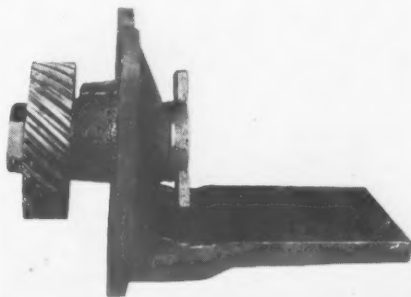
The Magneto Bracket and Showing Flange With Drive Shaft and Gear
